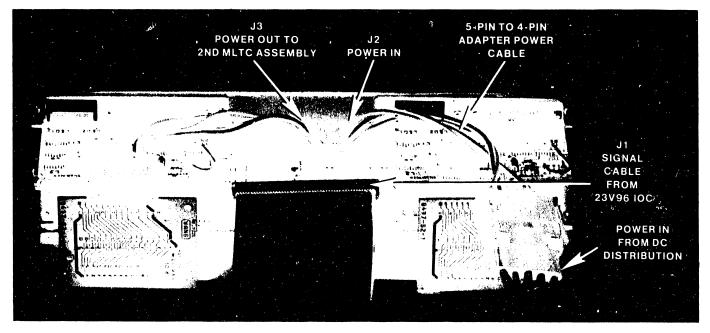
270-1003 Multiline TC Back Panel Assembly with Cabling
